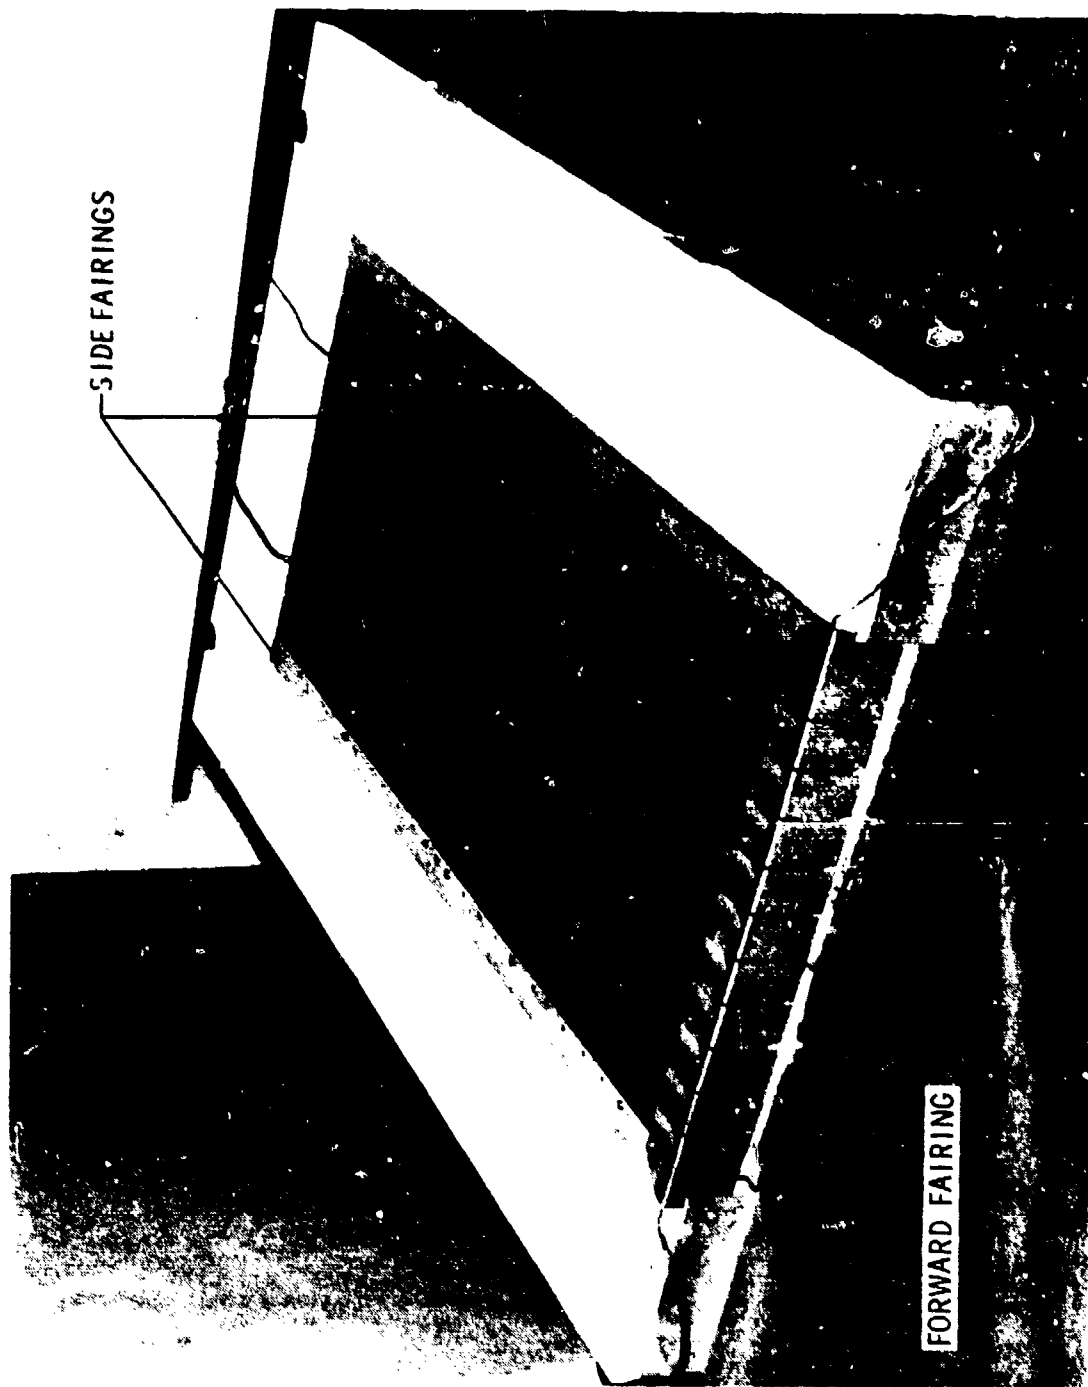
Test panel mounted in wind-tunnel closeout fixture.
